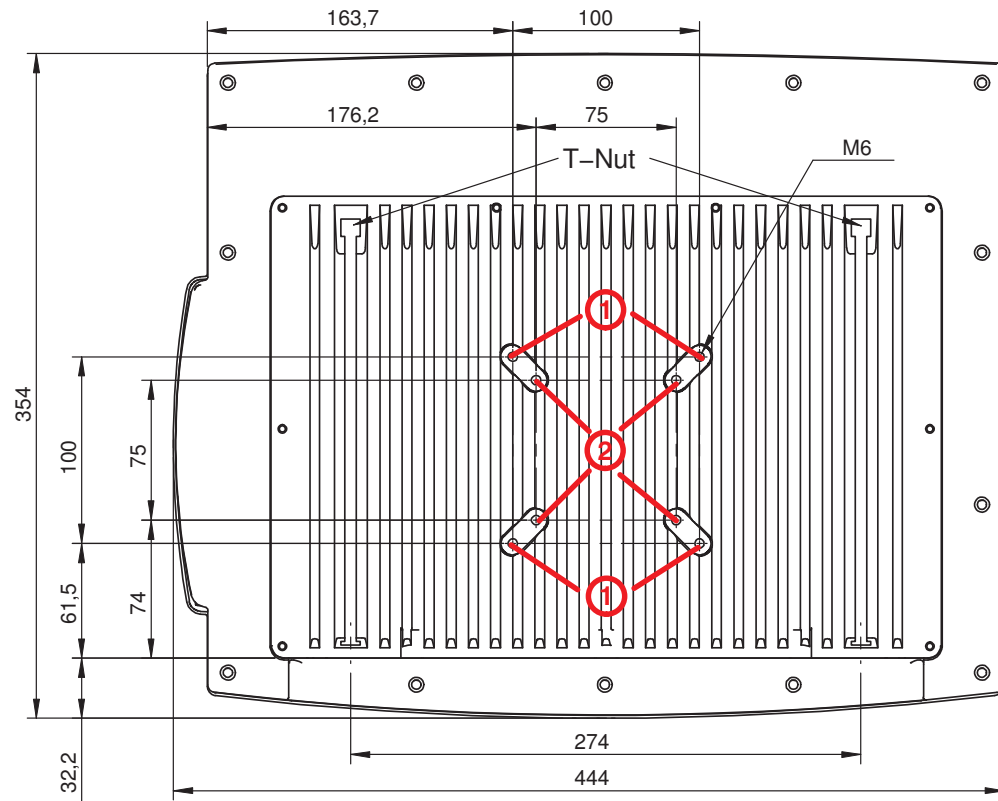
Back, C15 enclosure (all dimensions in mm)
